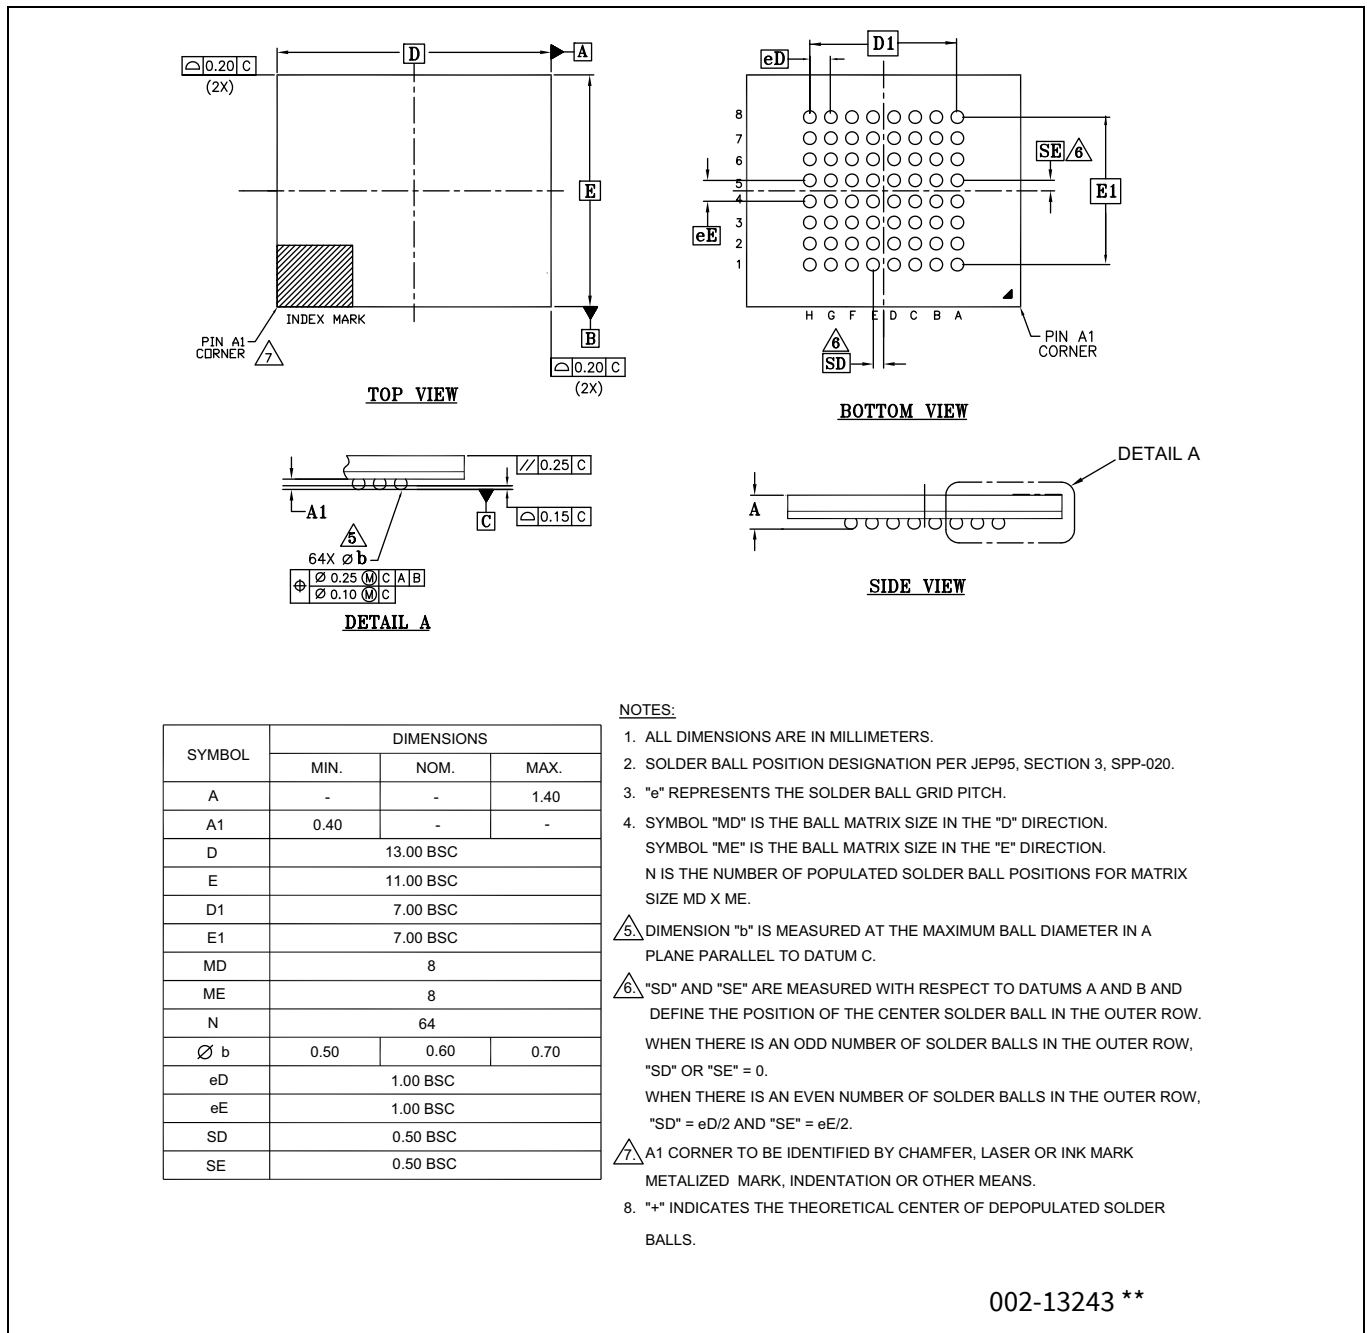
64-ball FBGA (13.0 × 11.0 × 1.4 mm) package outline (PG-LFBGA-64), 002-13243
